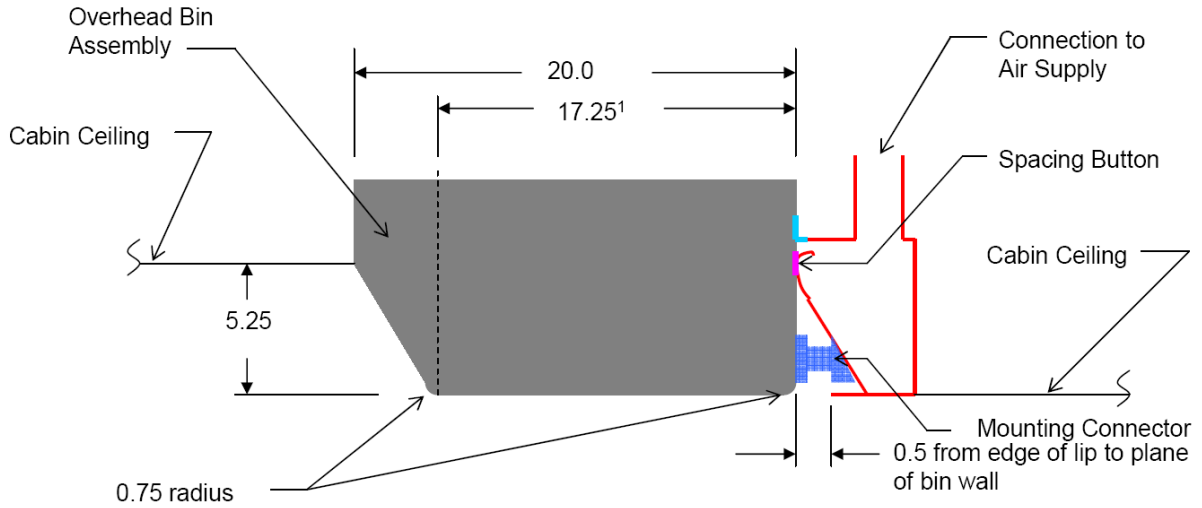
Mounting of the diffuser assembly in the cabin(All dimensions are in inches)
